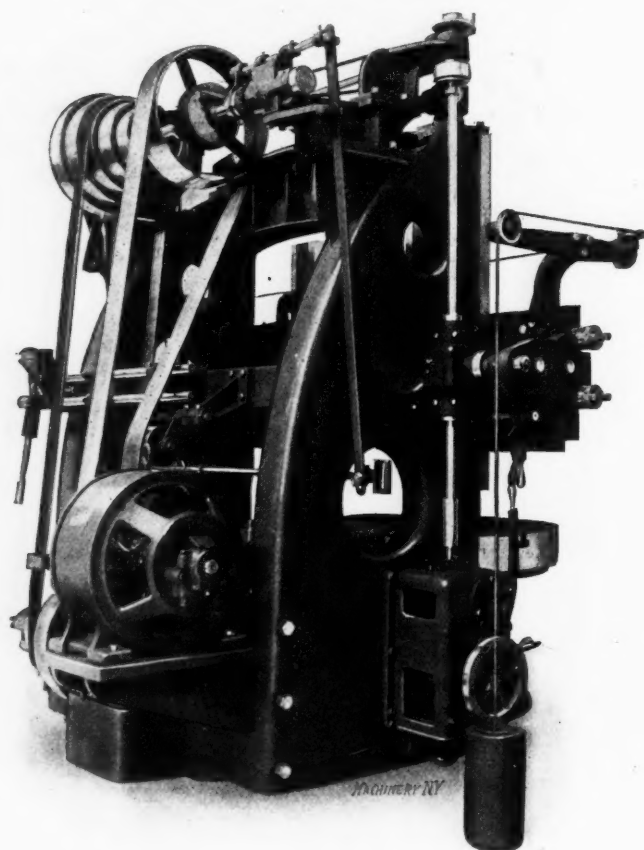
Constant-speed Motor-drive for Colburn "New Model" Boring Mills
